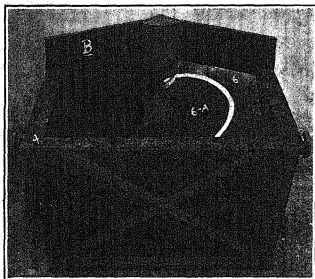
COPE CONTAINER AND COPE PATTERN BLOCK AND BLADE PATTERN.
